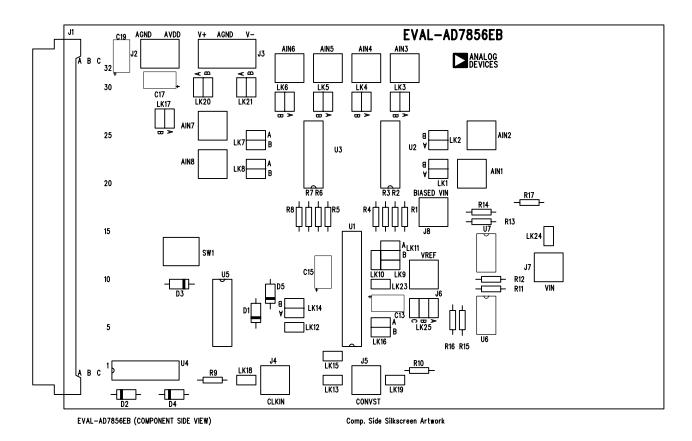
AD7856 Evaluation Board Component Placement Drawing (Component Side).
